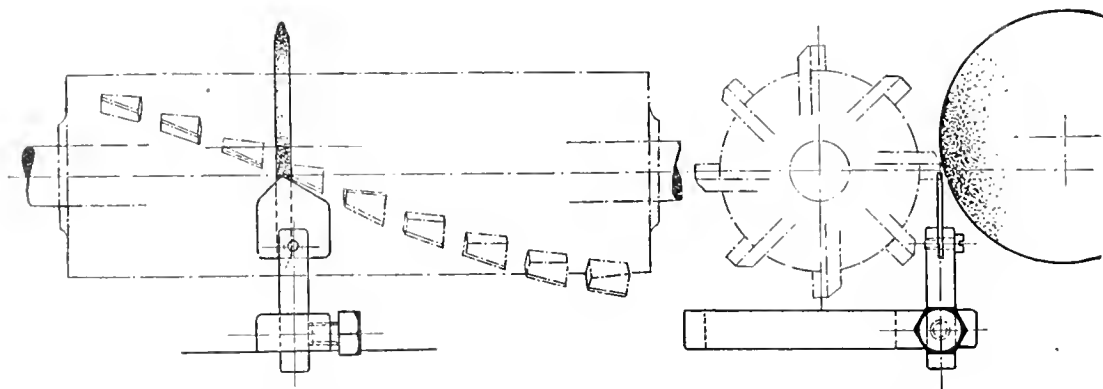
RELIEVING AND SHARPENING TEETH OF FRANCIS MILLING CUTTER
